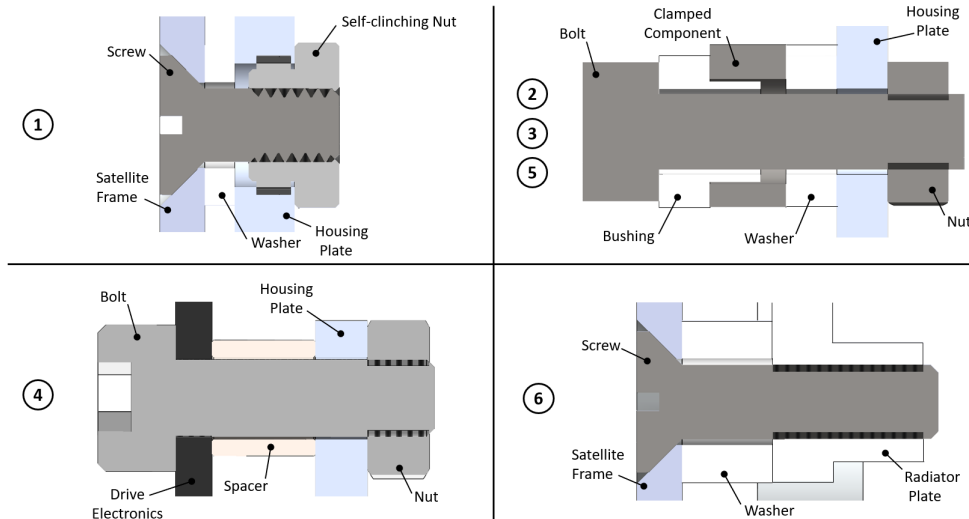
Detailed Cross-sectional View of the Four Types of Mechanical Connections of the Housing Plate.
